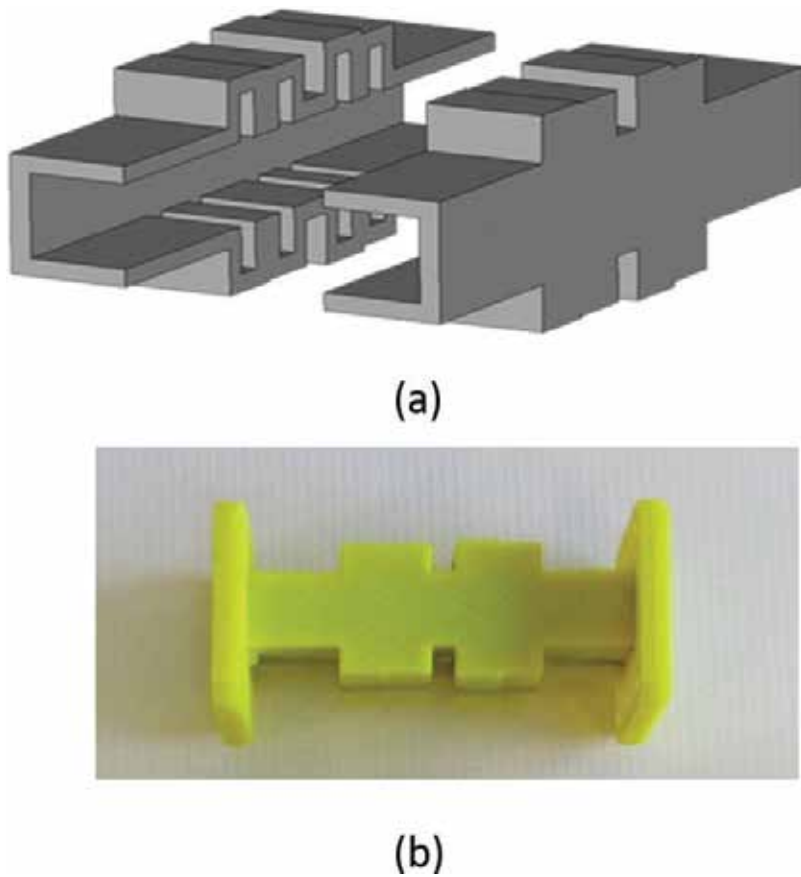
(a) CAD pieces and (b) assembled low-pass filter.
